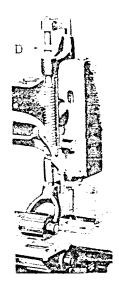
Adjustment for Regulating Pressure on Upper Feed Roll
